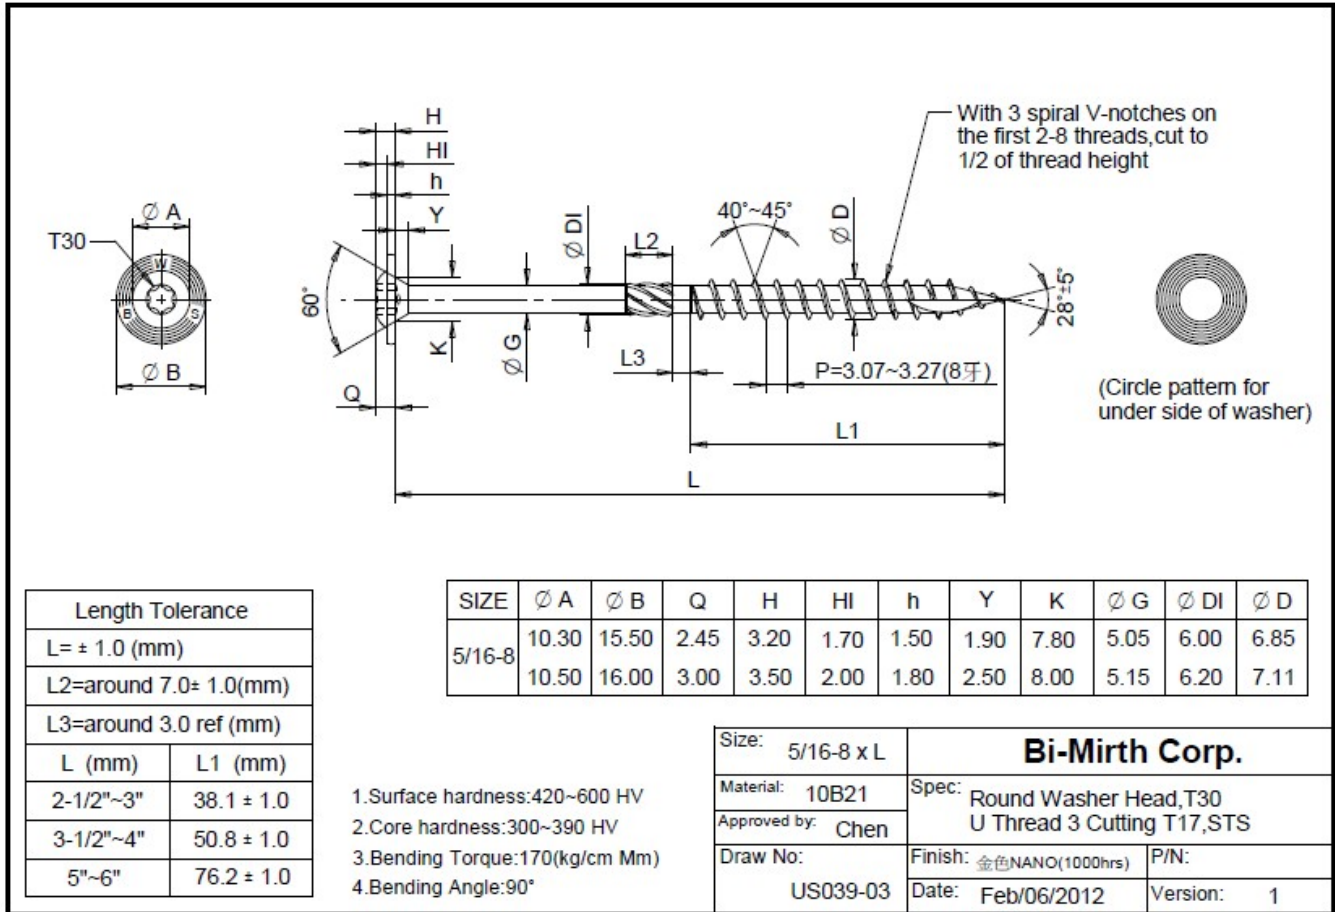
A part level drawing for the CTX 15 fasteners, lengths from 3 to 6 inches. The six inch fastener does not have the knurled shoulder.
